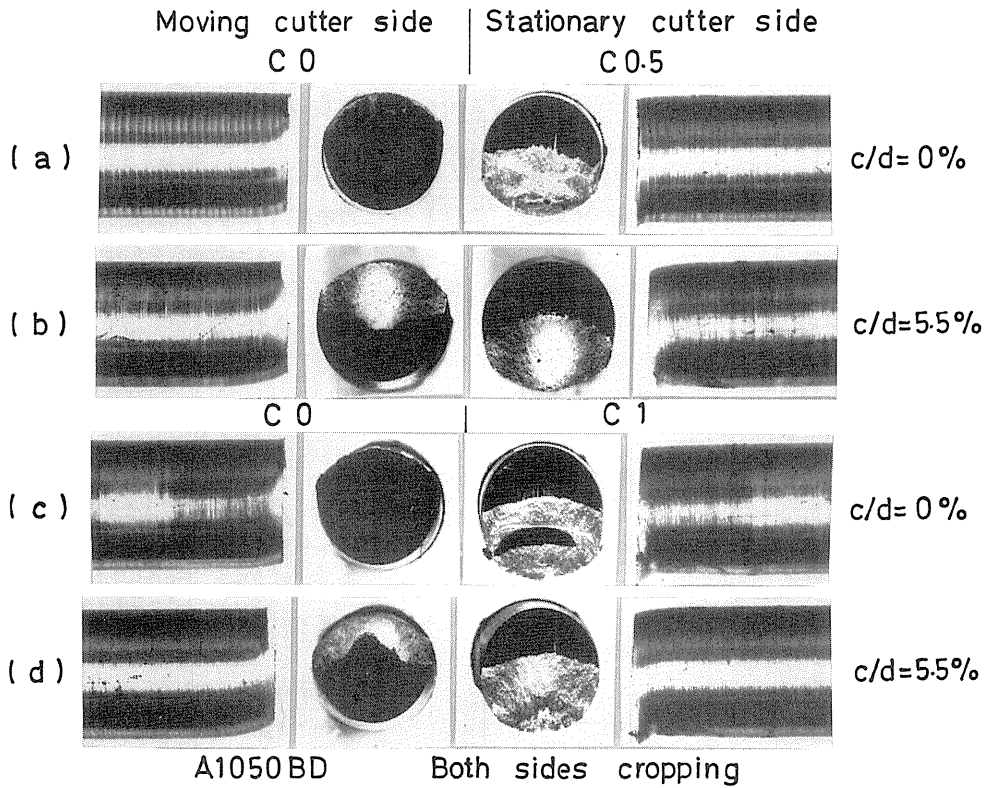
Cut end surface of the aluminum bar cropped by combined tool apparatus.
